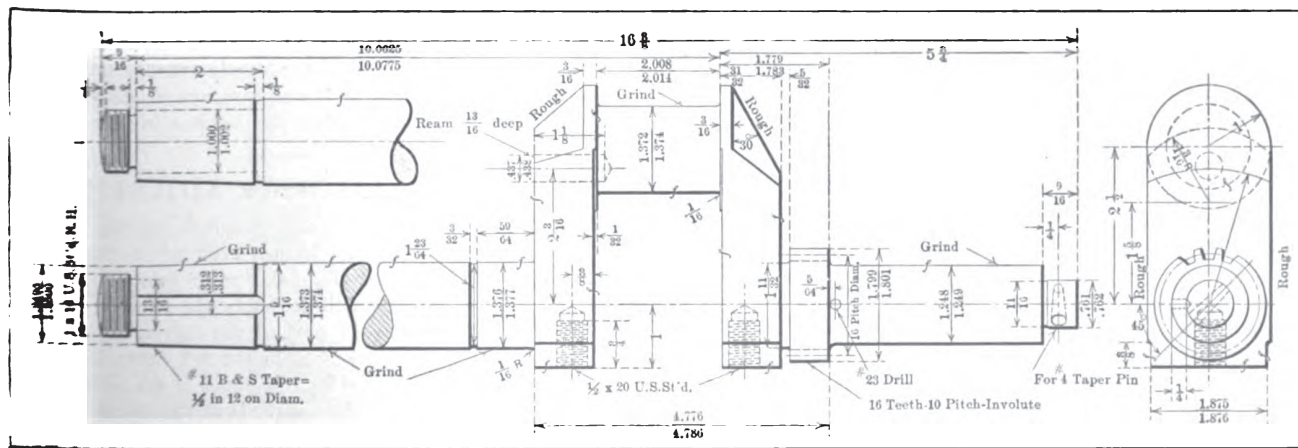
Crankshaft of 40-point carbon open hearth steel, with liberal bearings surfaces, stout arms and means of direct and auxiliary balancing by thorough use of an auxiliary balance gear
